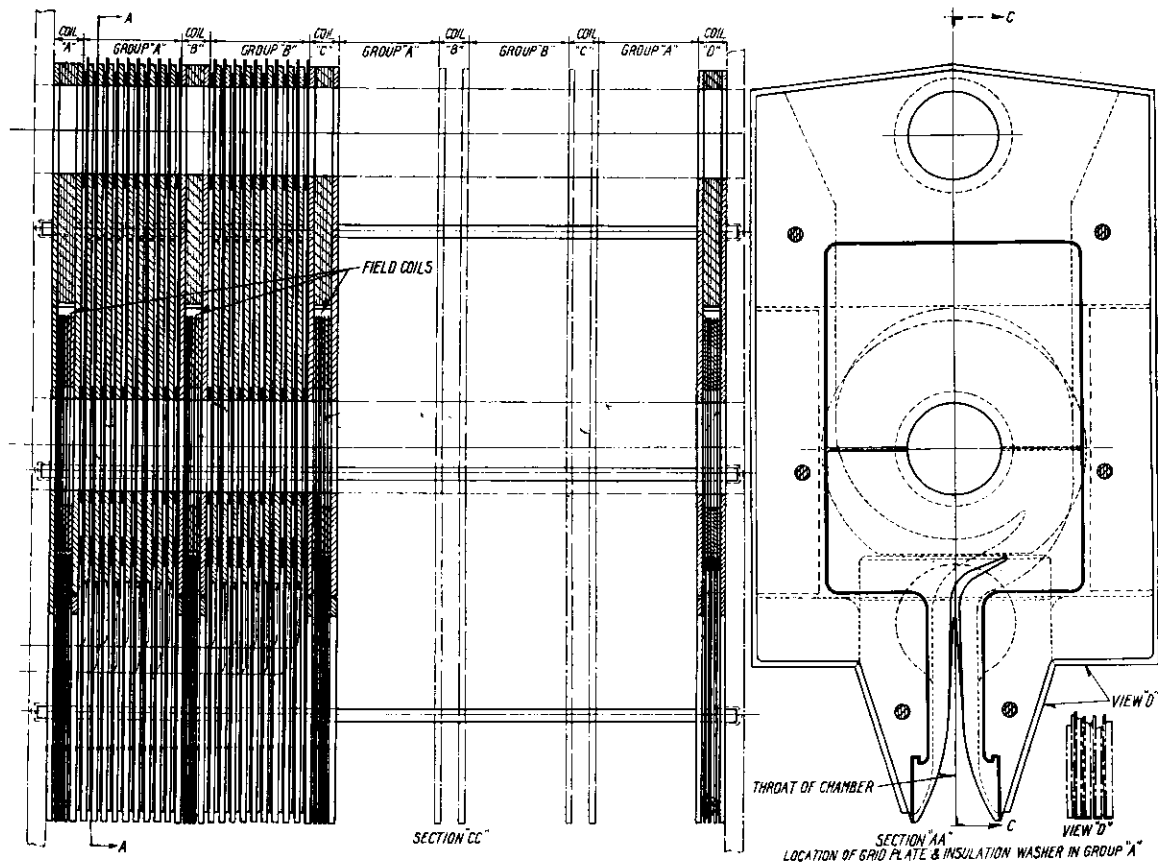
OUTLINE, SHOWING CROSS SECTION AND END VIEW OF DEIONIZING CHAMBERS
